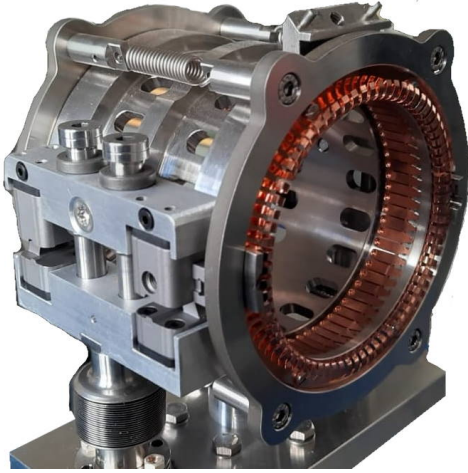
RF cage assembly, ready for installation into the viewer vacuum chamber.
